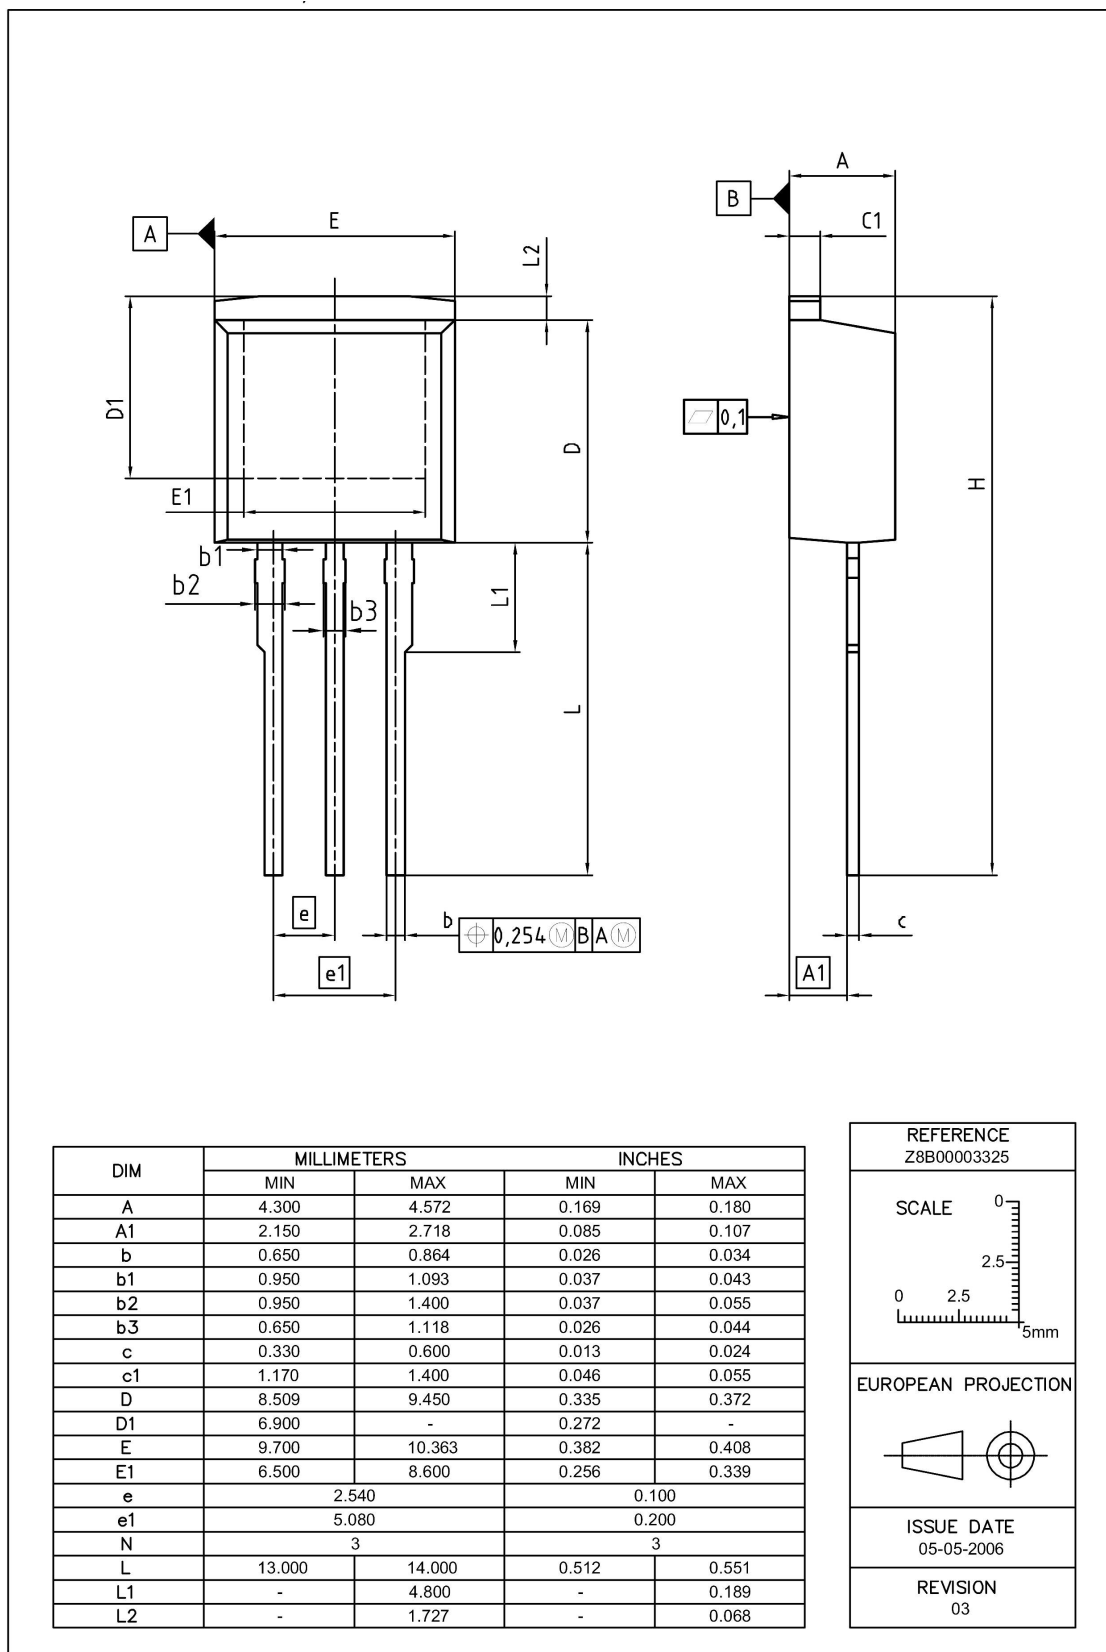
Outline PG-TO 262, dimensions in mm/inches
